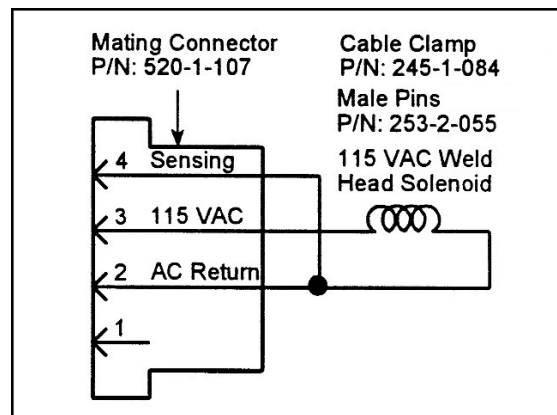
115 VAC Weld Head Solenoid
